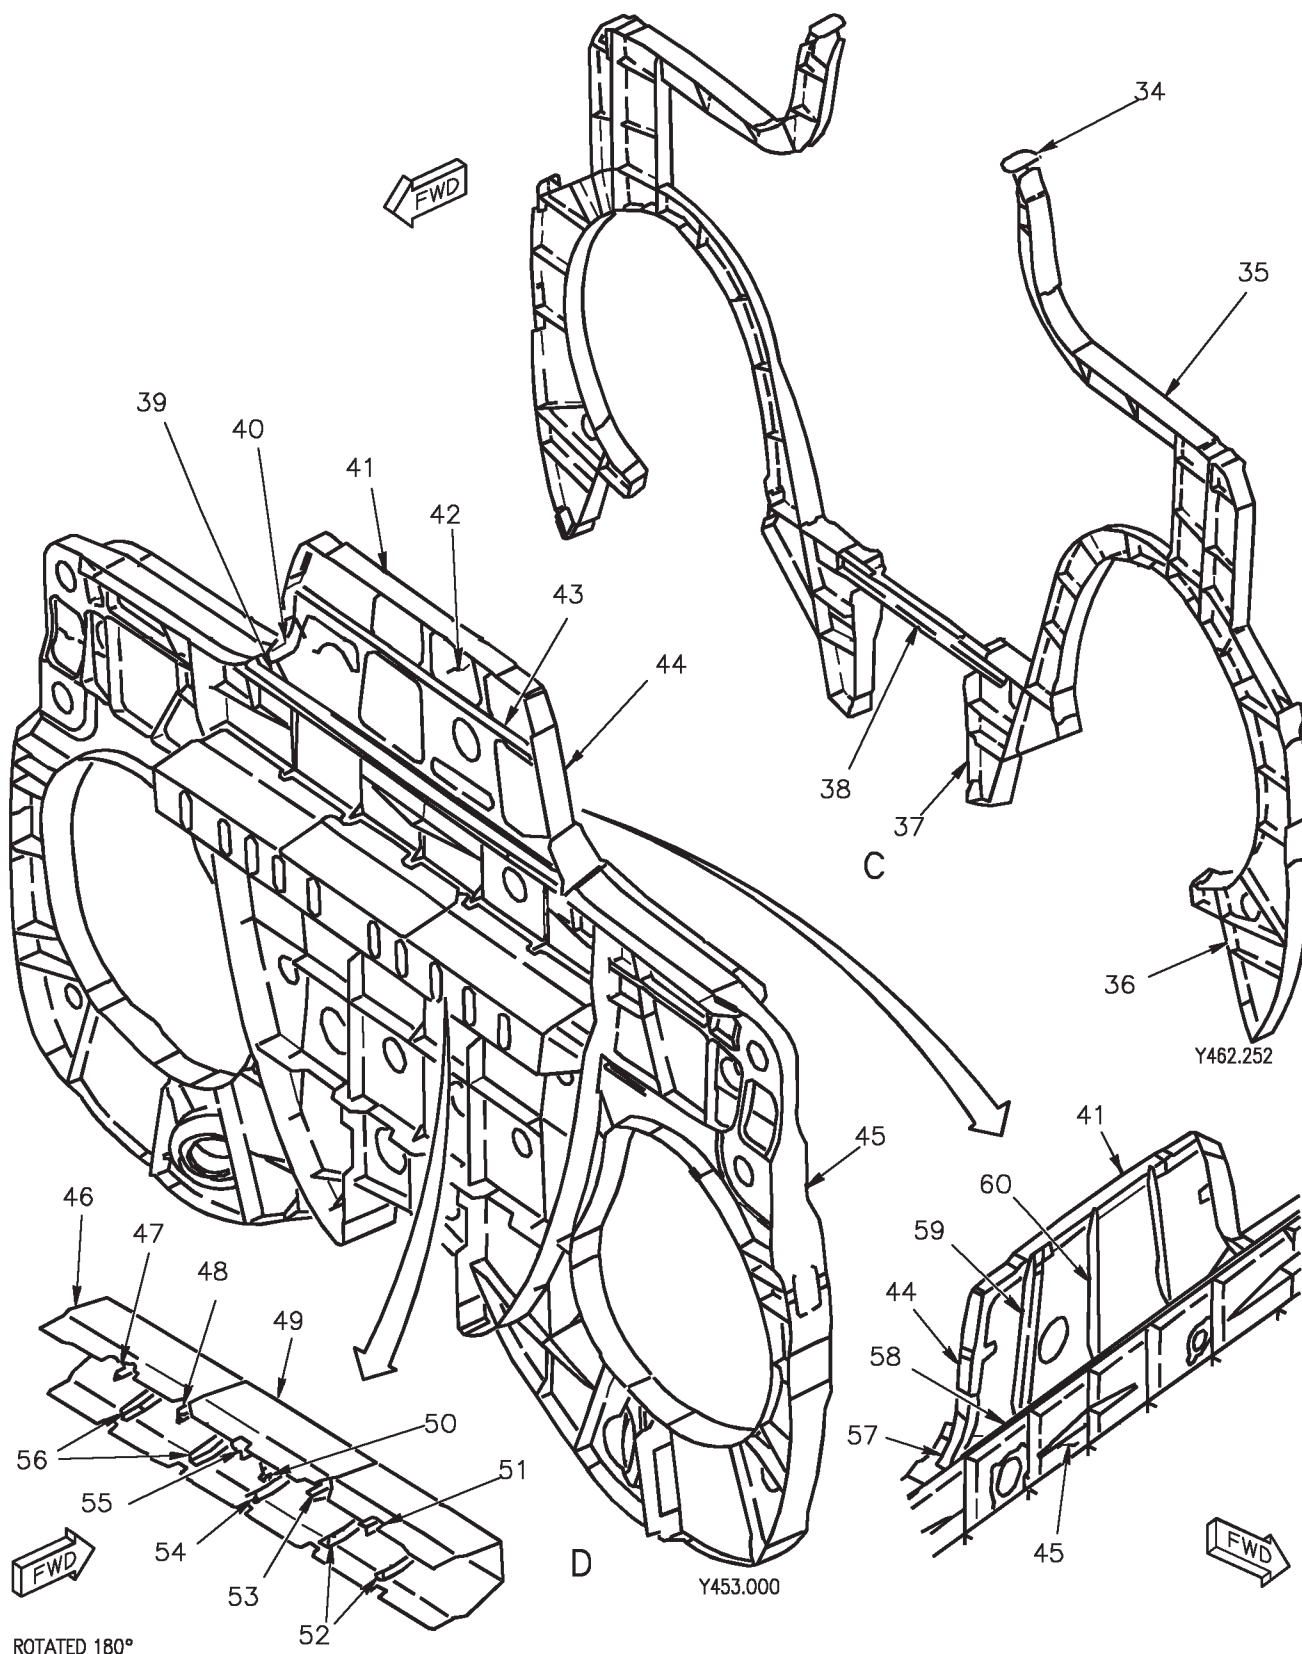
Bulkheads, Formers, Longerons, and Stringers (Sheet 4)
